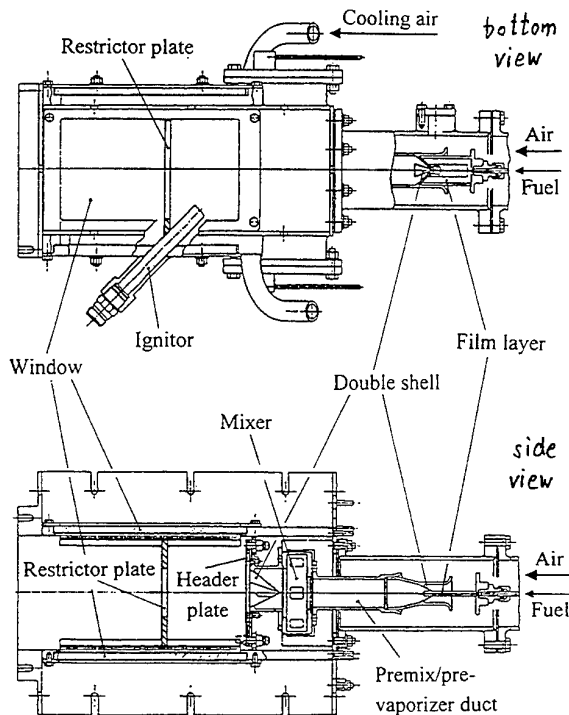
Drawing of the premix/prevaporizer duct built in the rectangular combustor; bottom and side view
